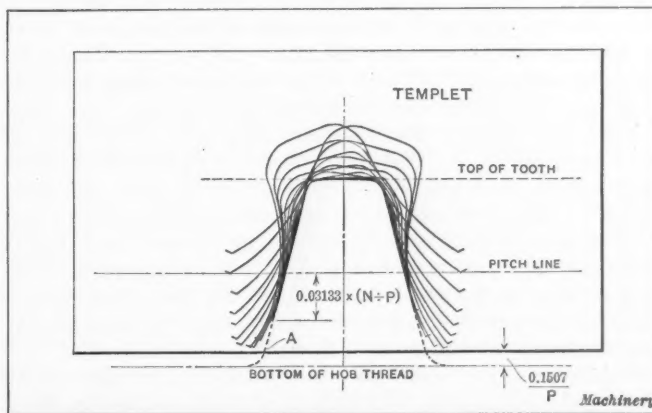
Lines scribed on the Hob Tooth Templet from a Hobbed Gear
